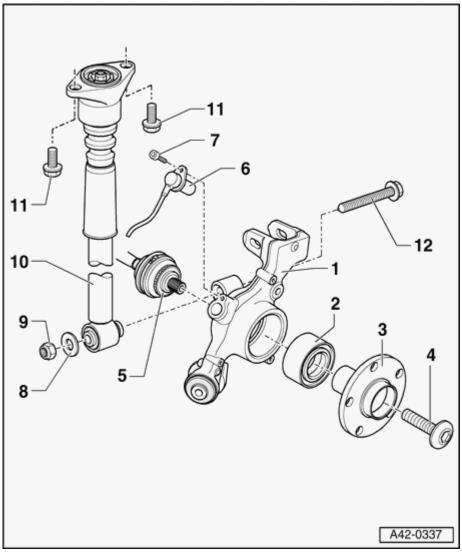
Rear Axle Part V, Wheel Bearing Housing (Steel) - All Wheel Drive Courtesy of VOLKSWAGEN UNITED STATES, INC.
